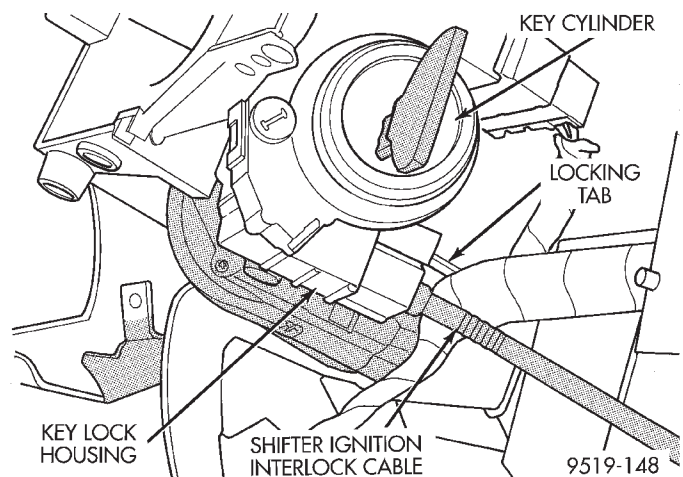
Shifter/Ignition Cable At Lock Cylinder Housing
